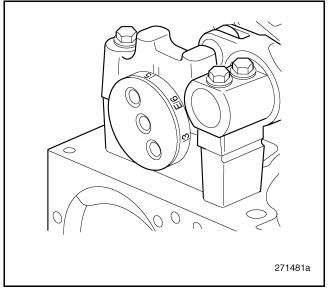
MP8 Engine Timing Marks — Camshaft Front End
